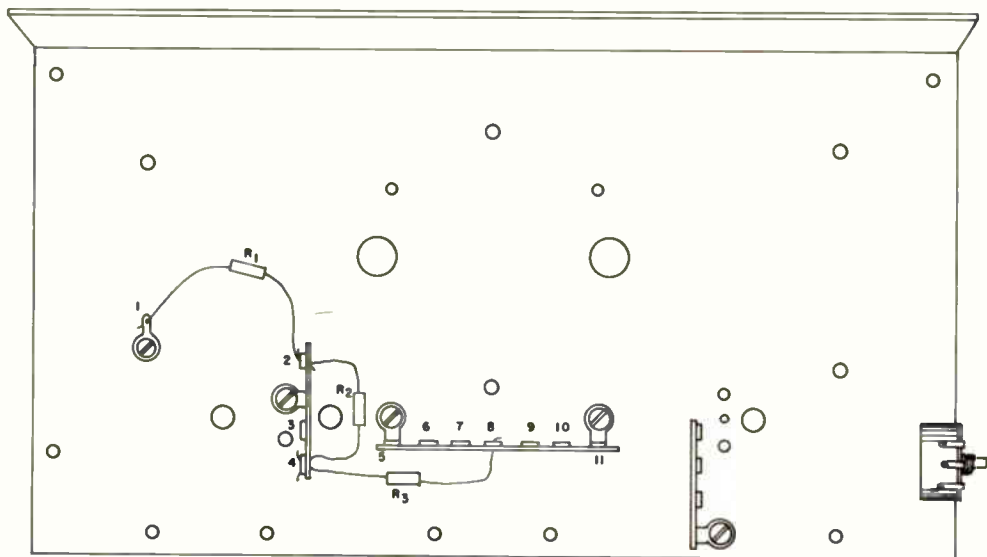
Top view of the chassis, showing the resistors you will install in this experiment.
